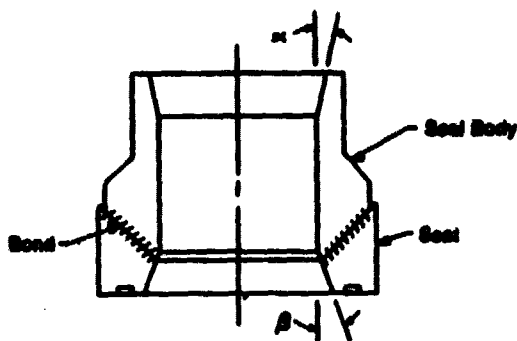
Double-Angle Seal Design with Conformable-Filled PTFE Materials
